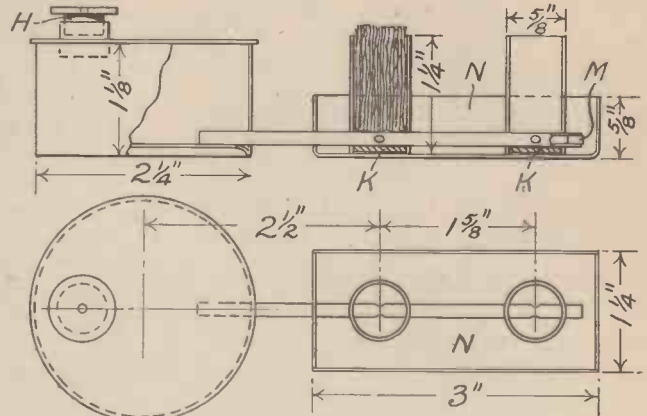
Part sectional elevation, and plan of spirit lamp.
